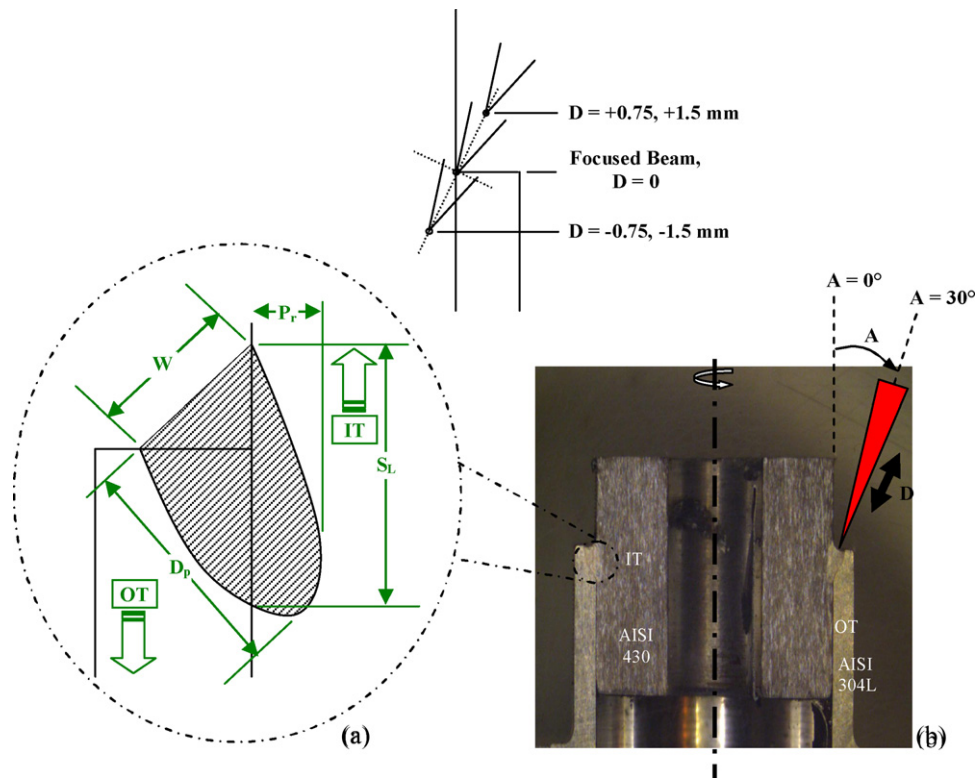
Diagrams showing (a) bead characteristics of a welded fillet joint (W , weld width; S_L , weld resistance length; D_p , weld penetration depth; P_r , weld radial penetration) and (b) adopted laser-welding procedure.
